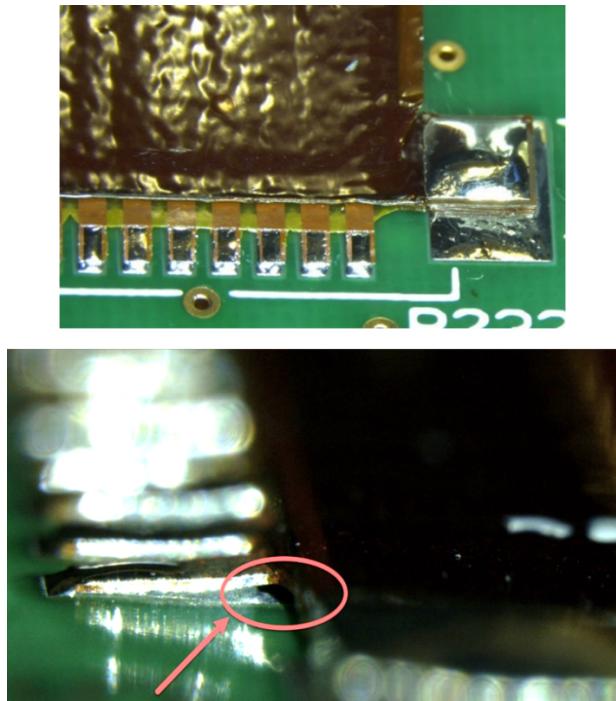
Top and side views of “finger” solder joints connecting a flex cable to a rigid board.
